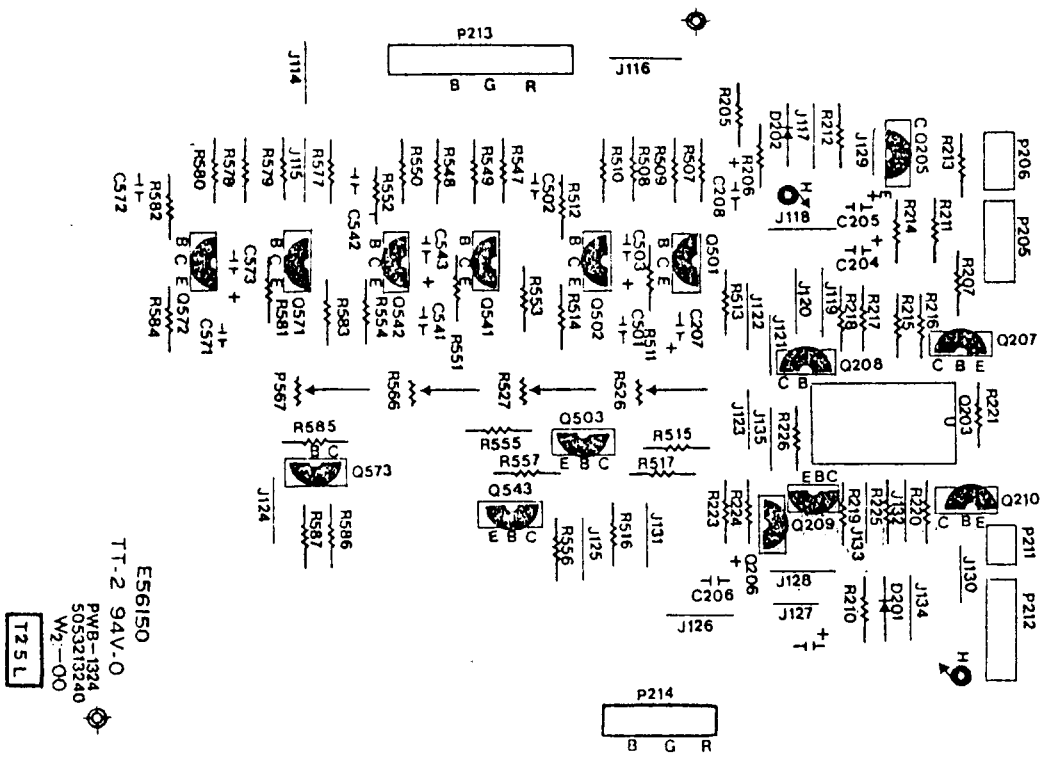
PCB-VIDEO DRIVE COMPONENTS LAYOUT
